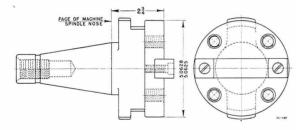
Sketch of quick change face mill arbor. For face mills 7" to 12" diameter.
